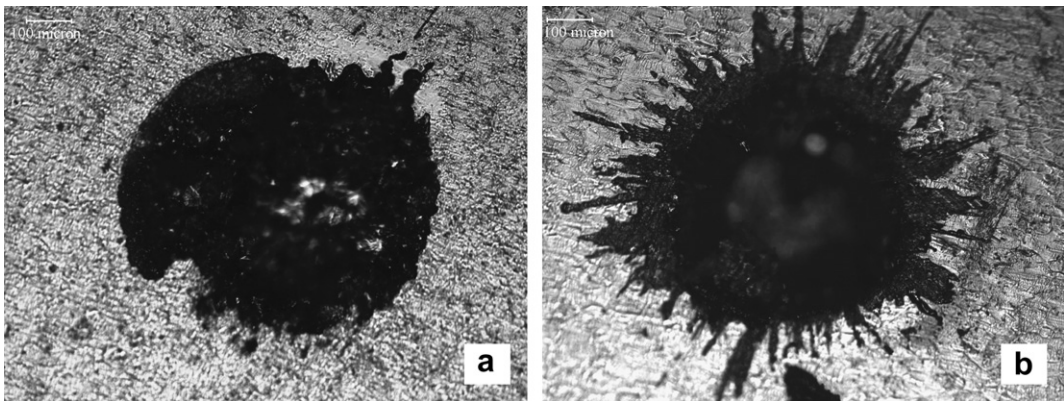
Typical shapes of the welded area at the interface of the two workpieces welded using the parameters as shown in Fig. 8.: (a) zone I and (b) zone III.
